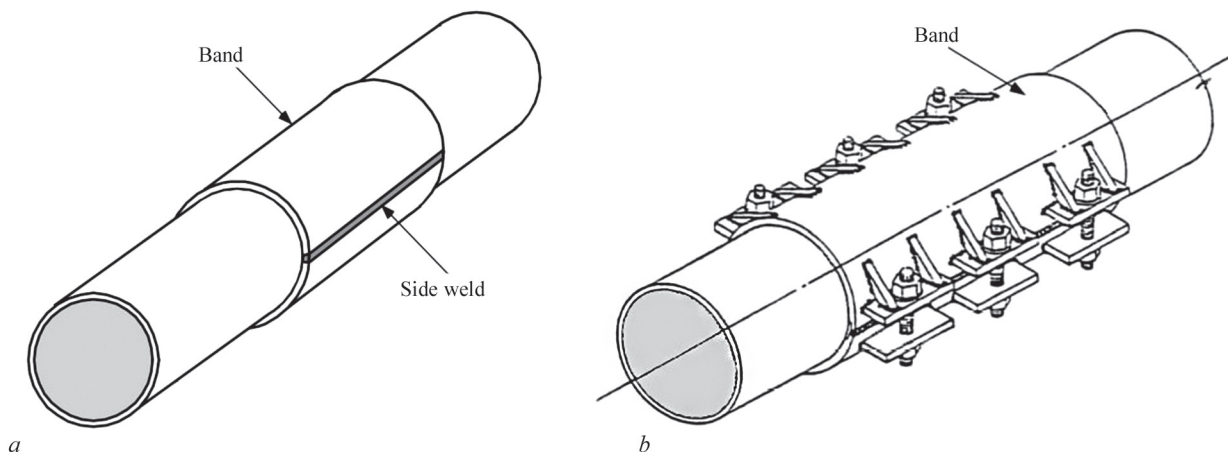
Types of bands according to the method of mounting: *a* — welded; *b* — on bolted joints
